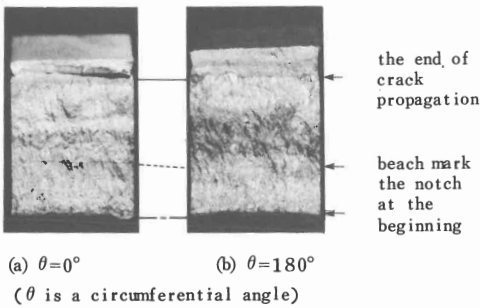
FRACTURE SURFACES OF TEST MODEL (TEST MODEL A)
